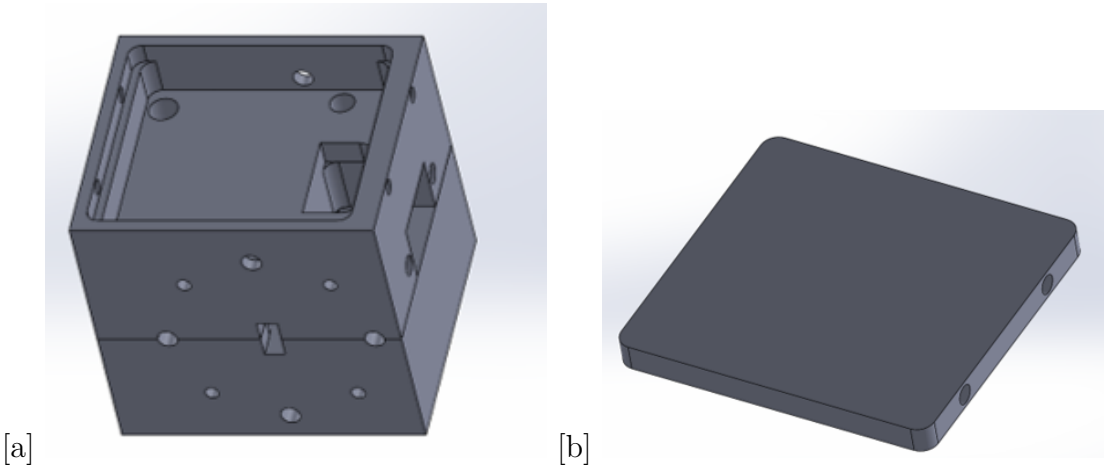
a) Rear view of the lower block designed in Solidworks. b) Cover designed in Solidworks.
